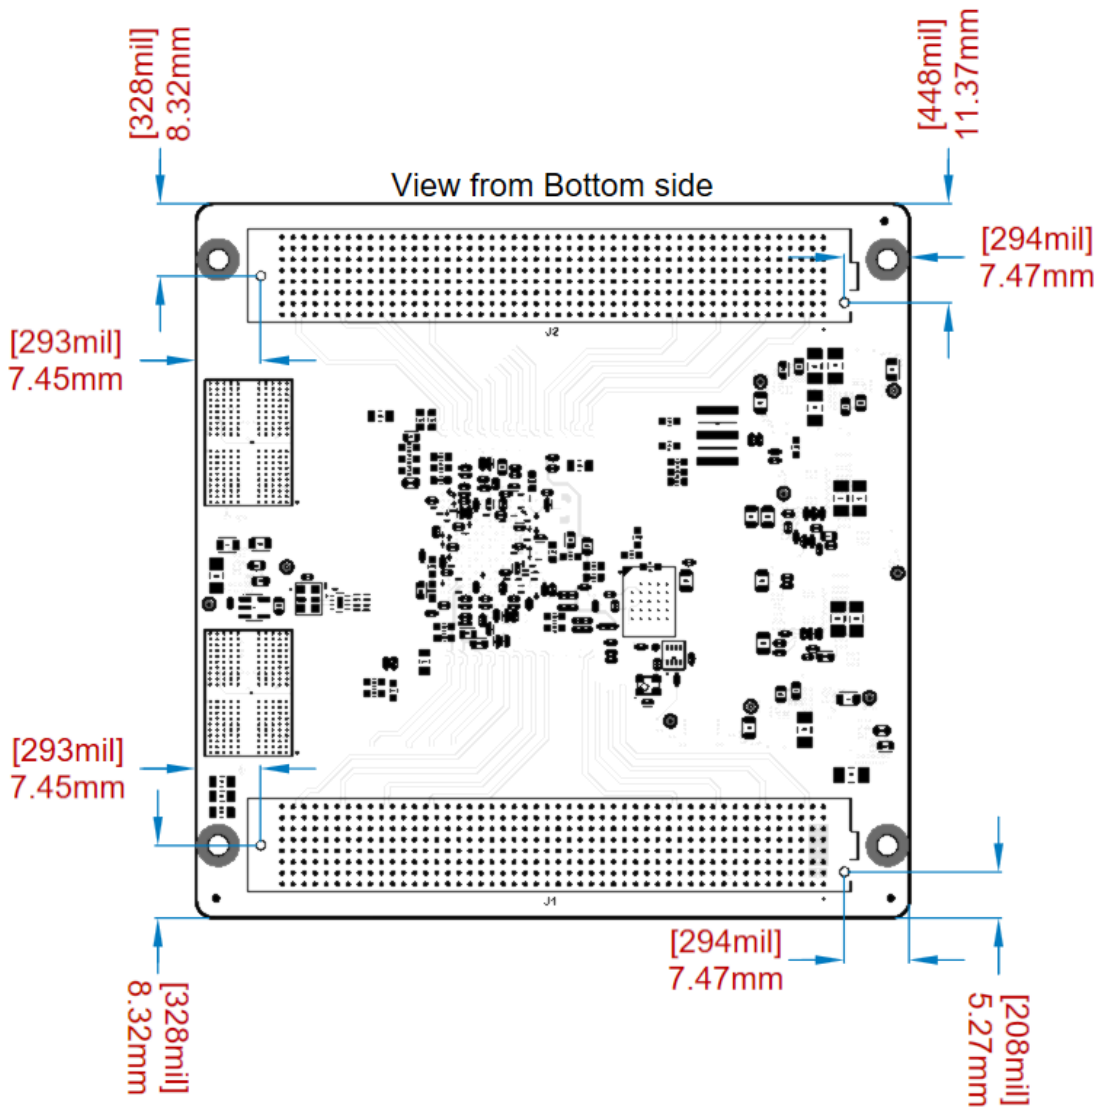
MitySOM-A5E Mechanical Outline, View from Bottom
